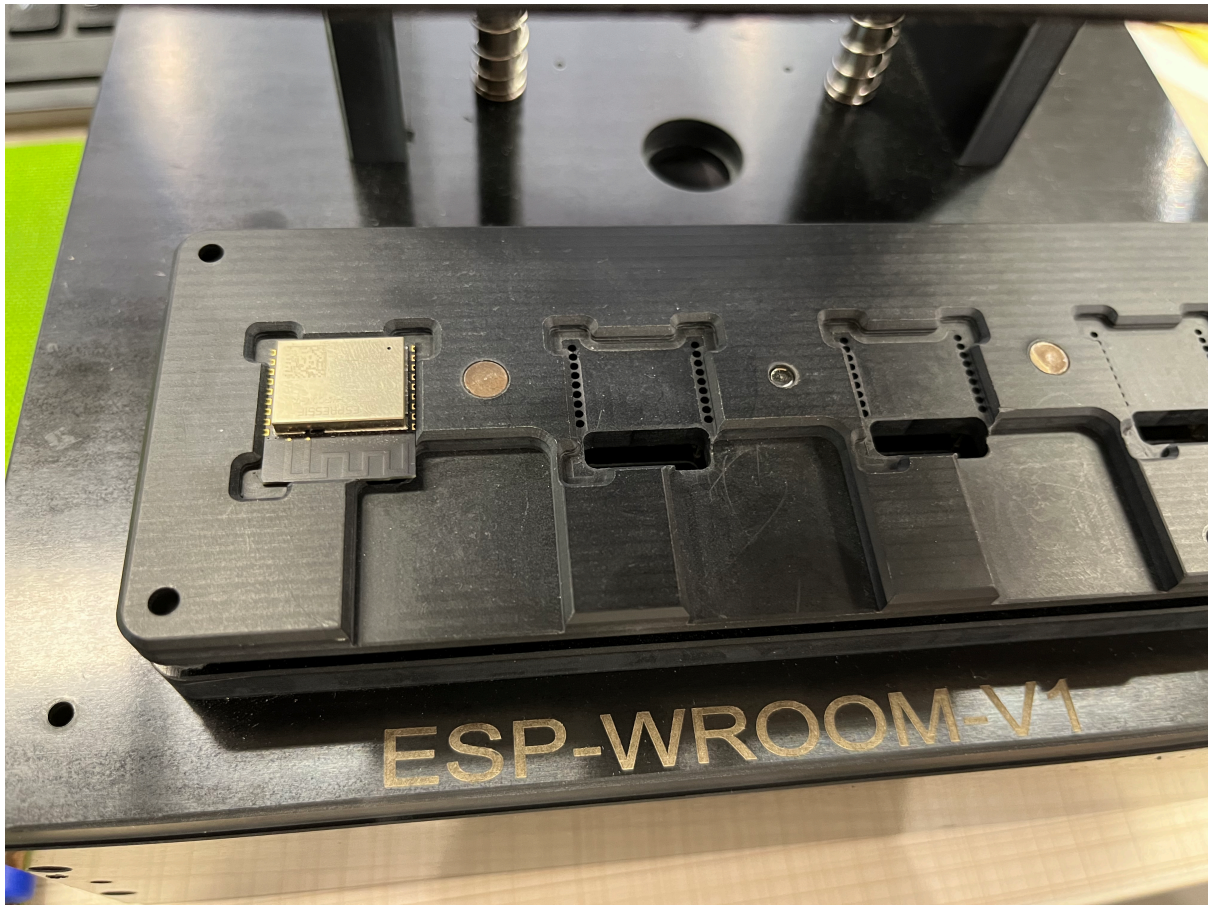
The Mounting Panel for the ESP-WROVER Test Fixture
